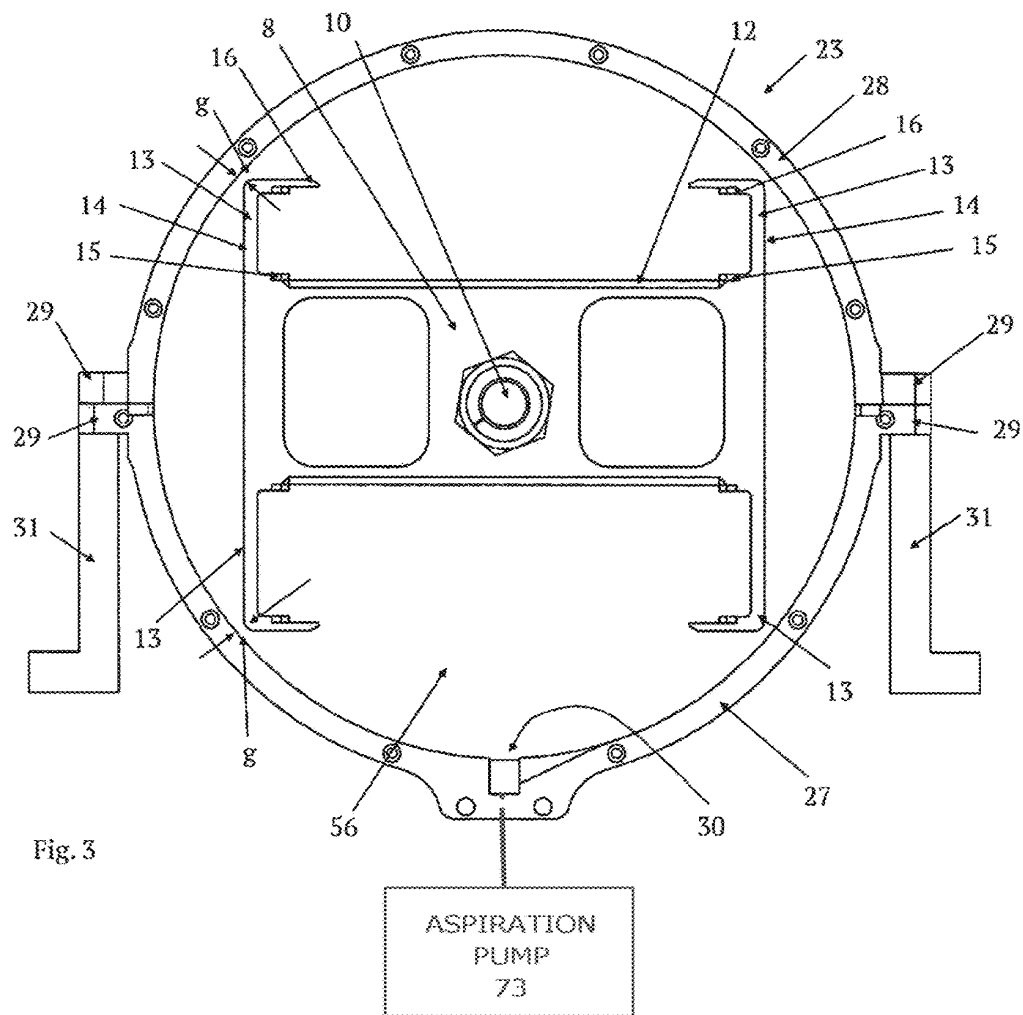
is a front view of a rotor and housing of a centrifuge with its front side wall removed. Ex. 1001, 9:33–34.
